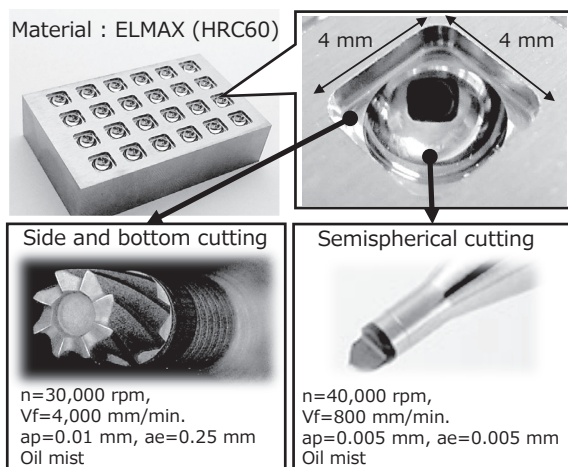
Example of mold machining with SUMIBORON BINDERLESS end mill
